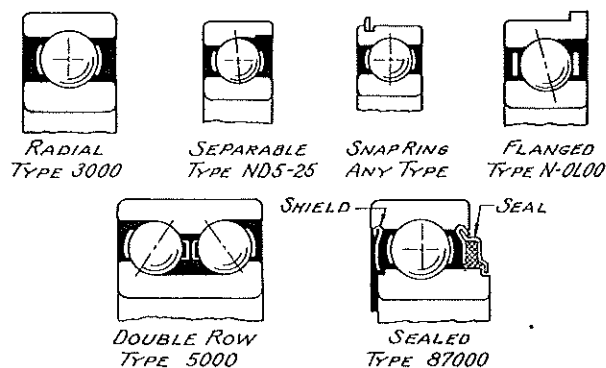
Ball bearing symbols. Courtesy New Departure Division of General Motors.
